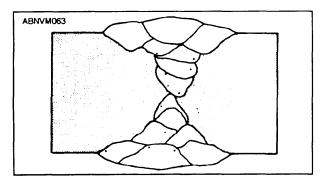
Grass porosity in a multipass butt weld.
